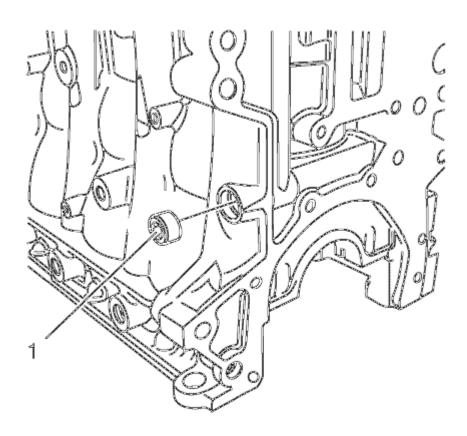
Oil Flow Check Valve Courtesy of GENERAL MOTORS COMPANY
